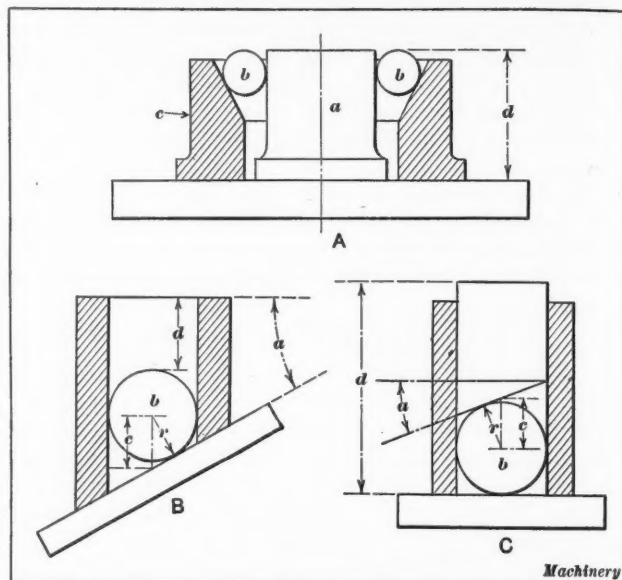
Other Instances where Balls can be used to Advantage in locating and gaging
